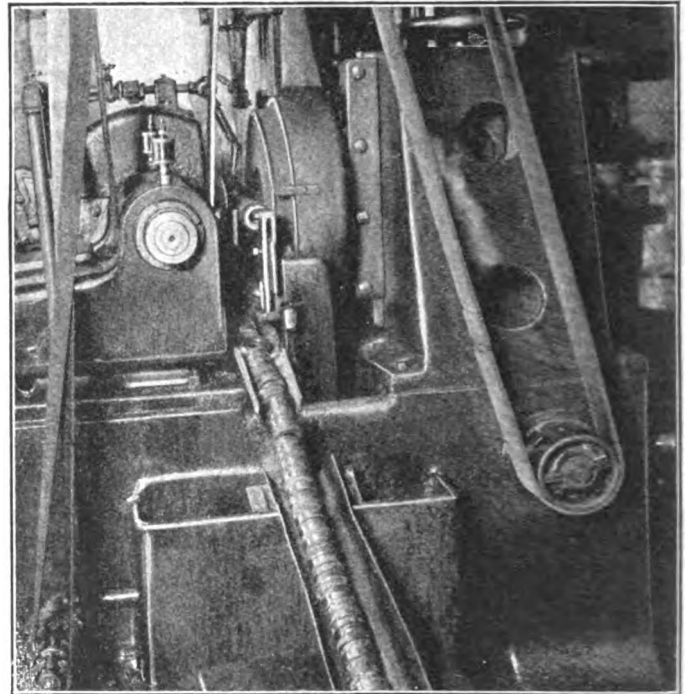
VIEW OF REAR OF MACHINE AND GRAVITY CONVEYOR
